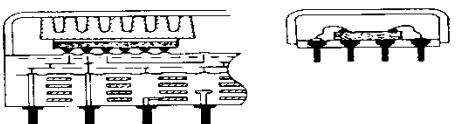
Cutaway view of a postmolded plastic package in the configuration of a dual-line package (DIP).
